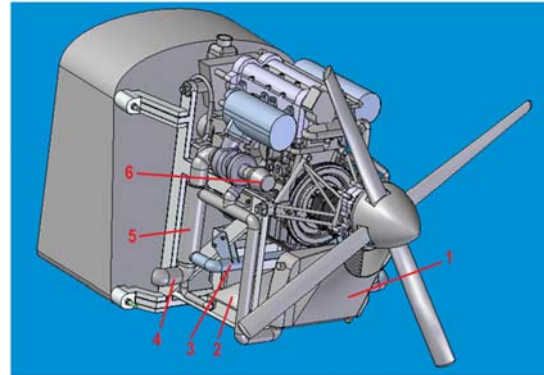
A partial assembly of the engine with the new intake and exhaust.
